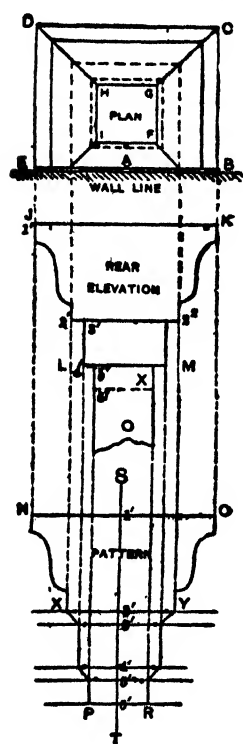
Plan, Elevation and Pattern for Rear of Leader Head
